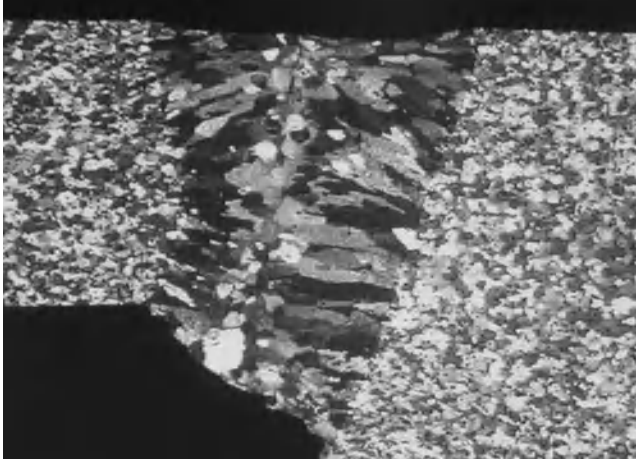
A 2 mm thick 6061T6 electron beam weld
